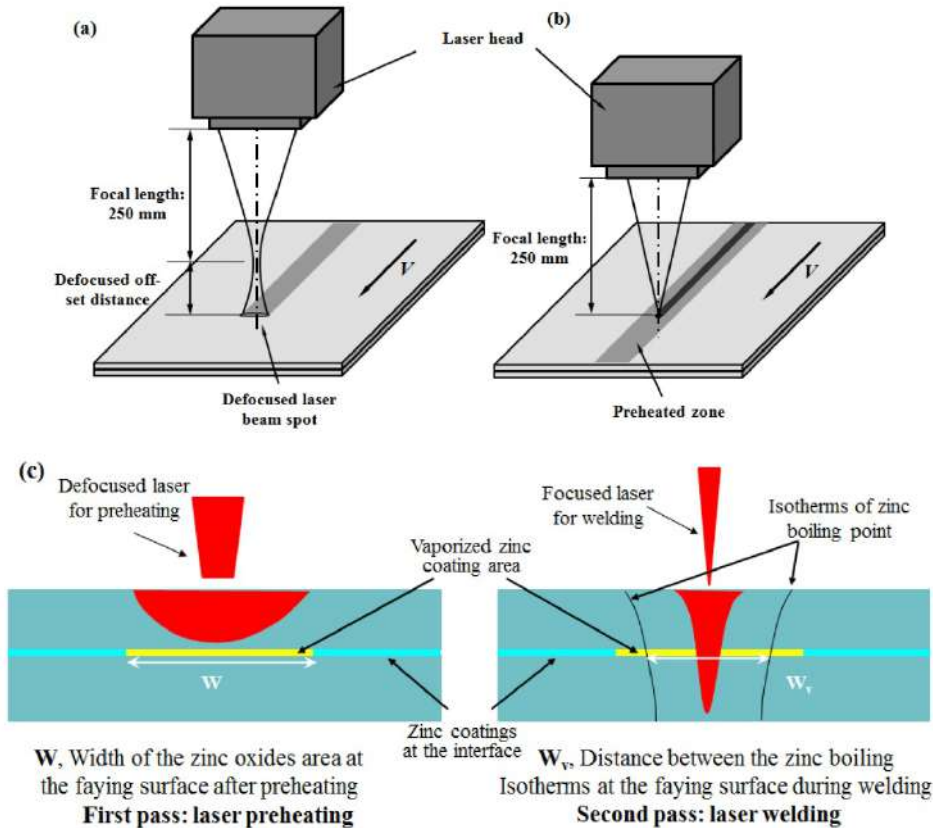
The schematic view of the two-pass welding process: (a) laser preheating, (b) laser welding, and (c) geometrically defined width of zinc coating treated during preheating and welding
